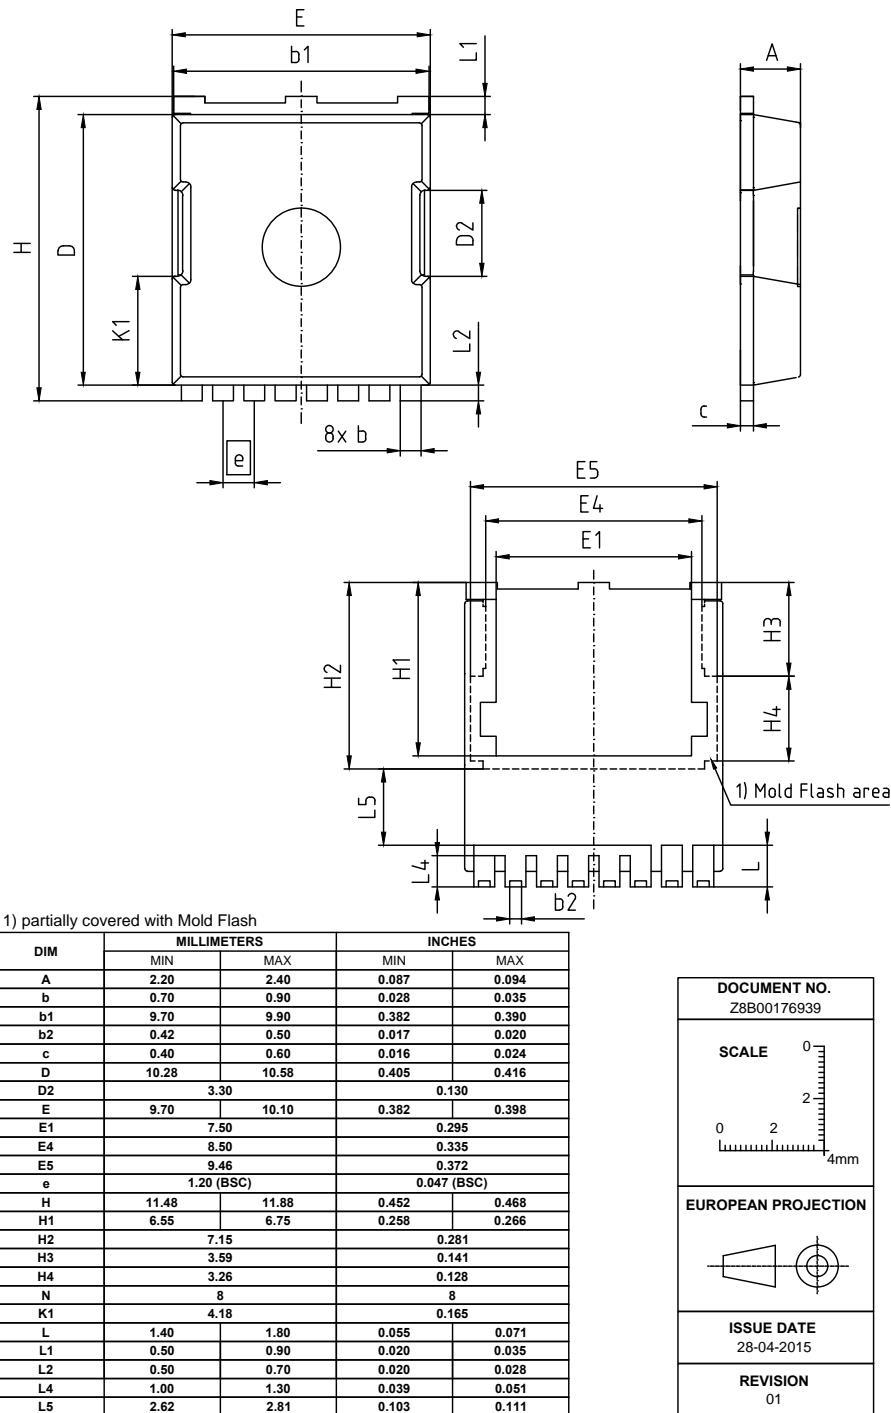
Outline PG-HSOF-8, dimensions in mm/inches
